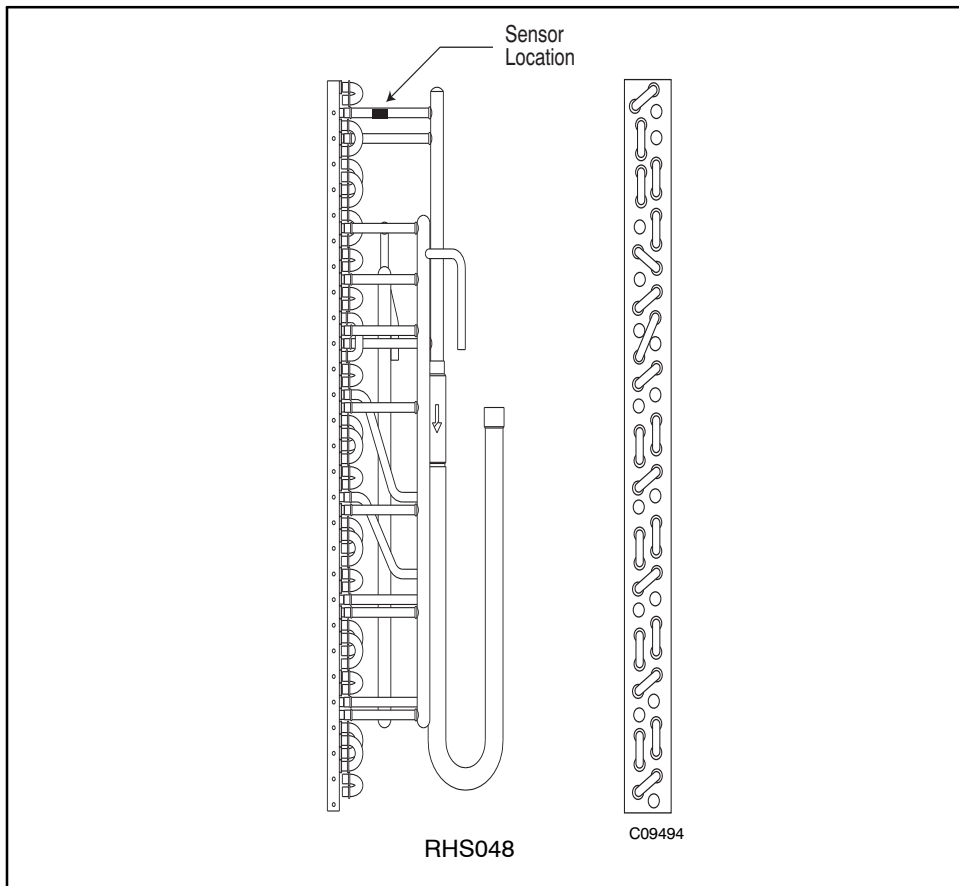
Motormaster® II Sensor Locations – 4 Ton Heat Pump Units
